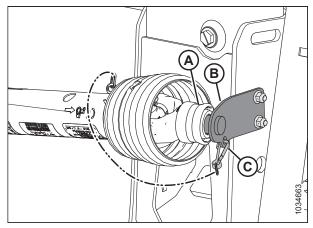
Driveline in Storage Position – Driveline B7038 or B7039
